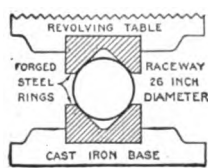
TURNTABLE WITH SKETCH SHOWING CONSTRUCTION OF BALL BEARING
